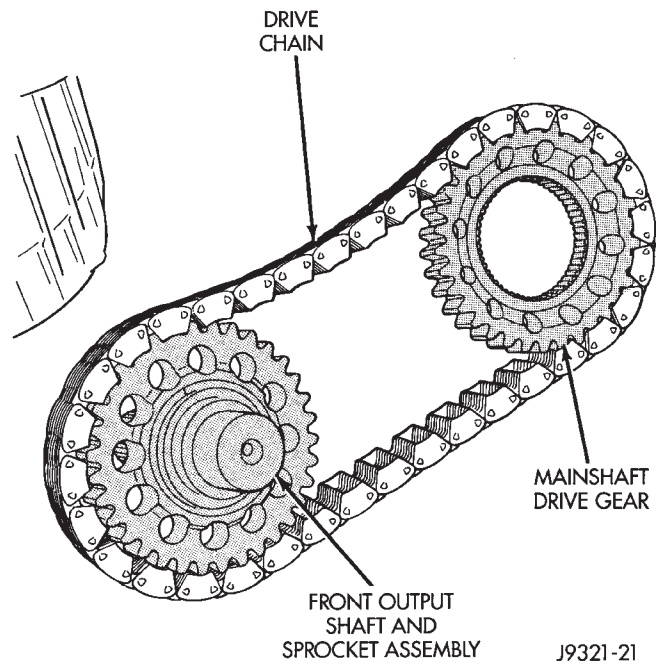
Front Output Shaft, Drive Gear And Chain Removal
